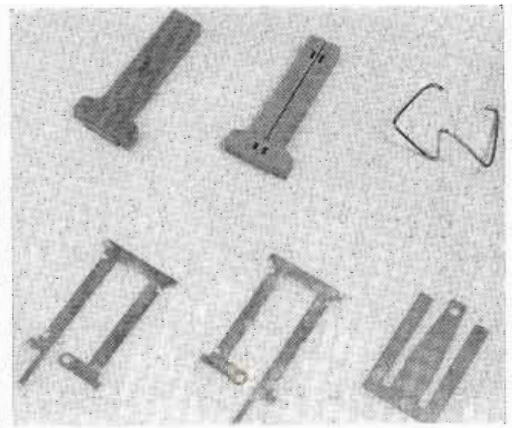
Unassembled parts of "guillotine" tuner. Music wire spring, serving as mount, is only fastening means
